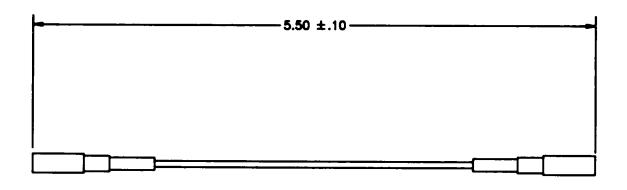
W1 RF Cable Assembly (PA-Coupler) Component Location Diagram (10372-1037 Rev. B)
